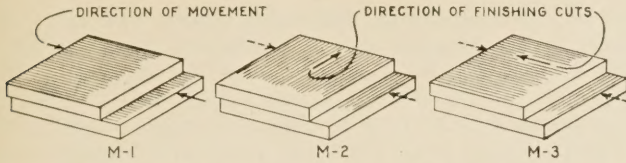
RELATION OF DIRECTION OF MOVEMENT TO DIRECTIONS OF FINISHING CUTS FOR BEARING PLATES TESTED.
